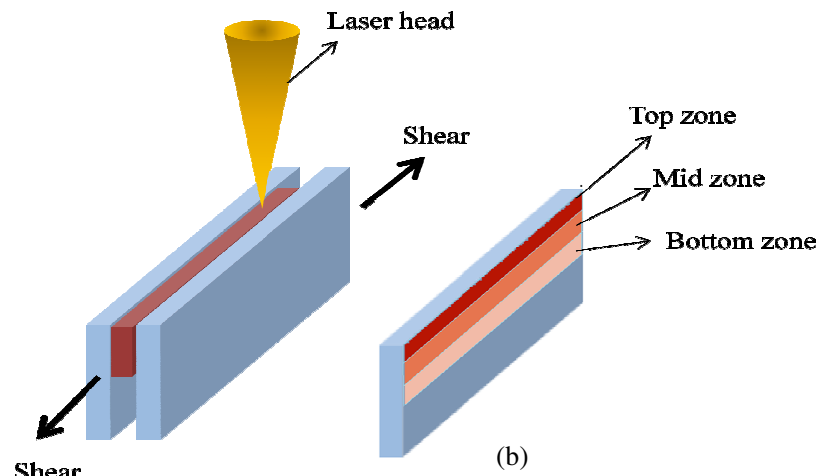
(a) Laser brazed specimen and (b) laser brazed zones of sheared specimen
